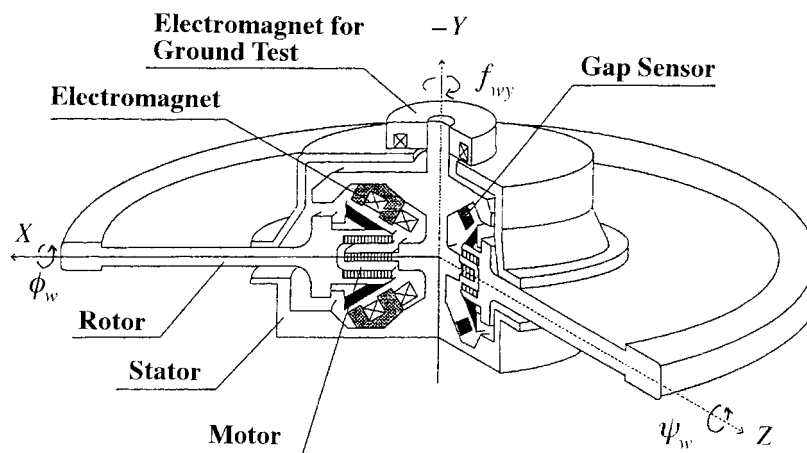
Cross section of Octa-Electromagnet-Type Active Magnetic Bearing Momentum Wheel
